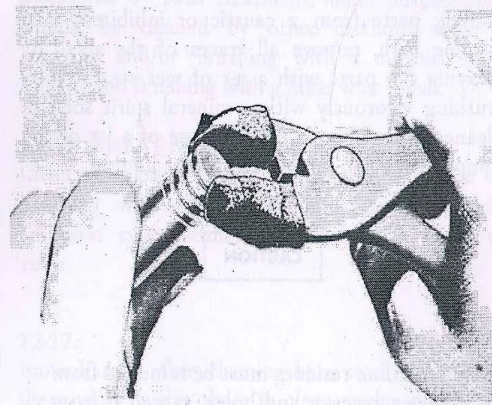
Removing Plunger From Hydraulic Unit With Taped Pliers.
